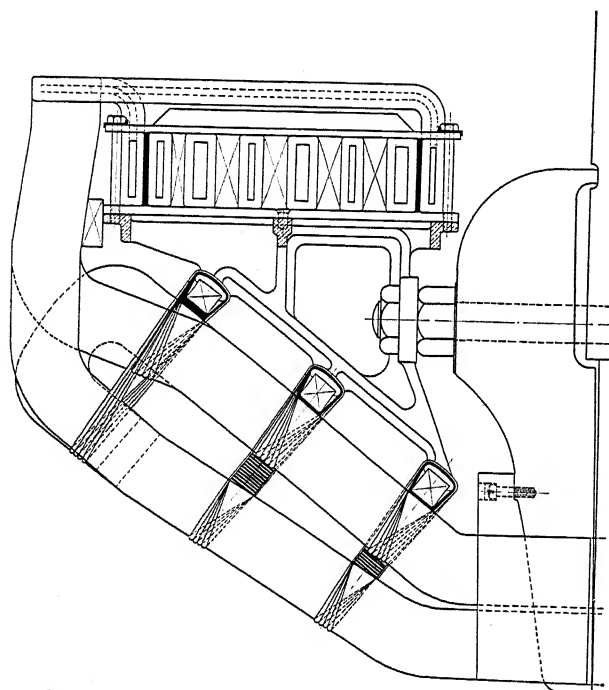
METHOD OF SUPPORTING PROJECTING ENDS OF STATOR COILS
